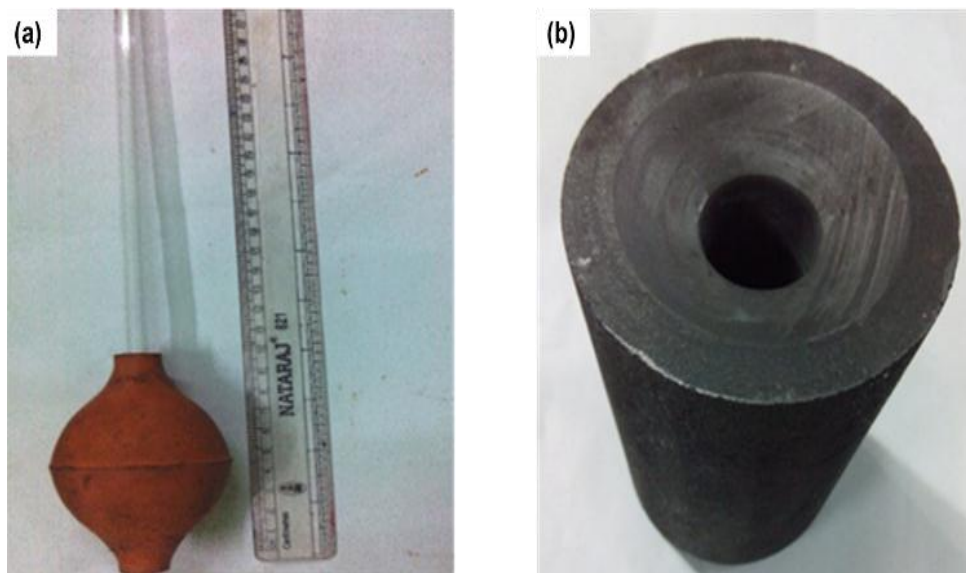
6 Molten metal Sample collection tube (a) silica pipette) and (b) graphite mould
